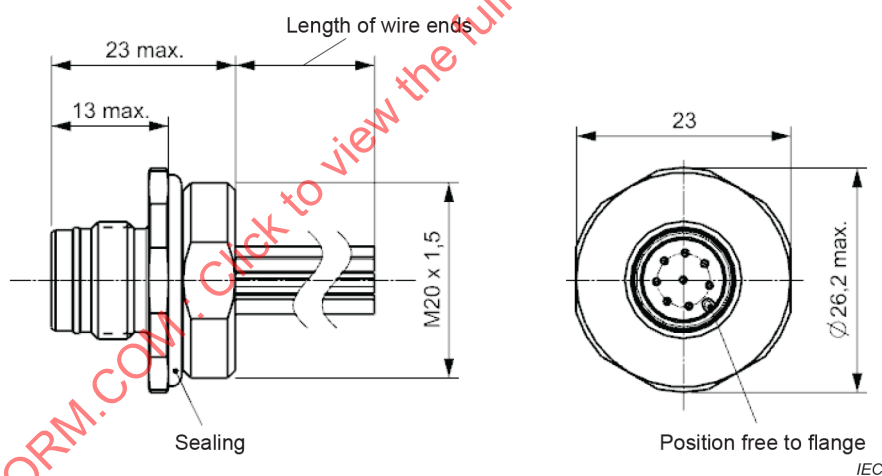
Fixed connector, male contacts, with M12 screw locking and outer push-pull locking, with wire ends, single hole front mounting thread M20 × 1,5
